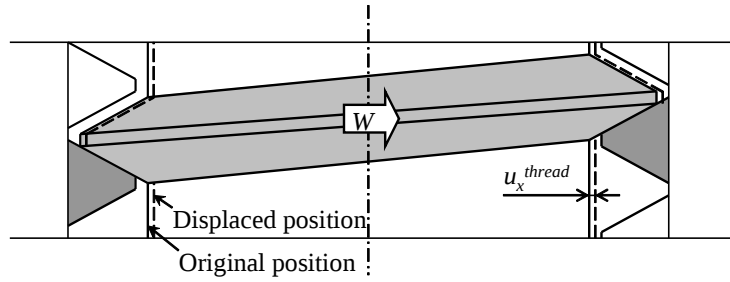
Transverse displacement of bolt thread in the state of complete thread-surface slip.
